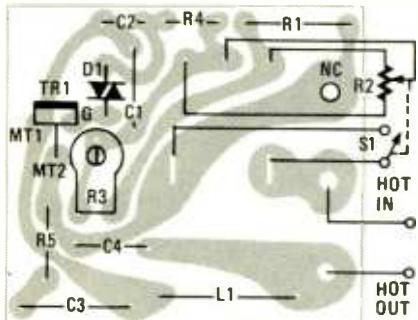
The completed printed-circuit board with all the parts in place is shown here. You may have trouble finding the brass screw terminals, so solder leads directly to the board from the power cords. The bottom terminal was not used.
